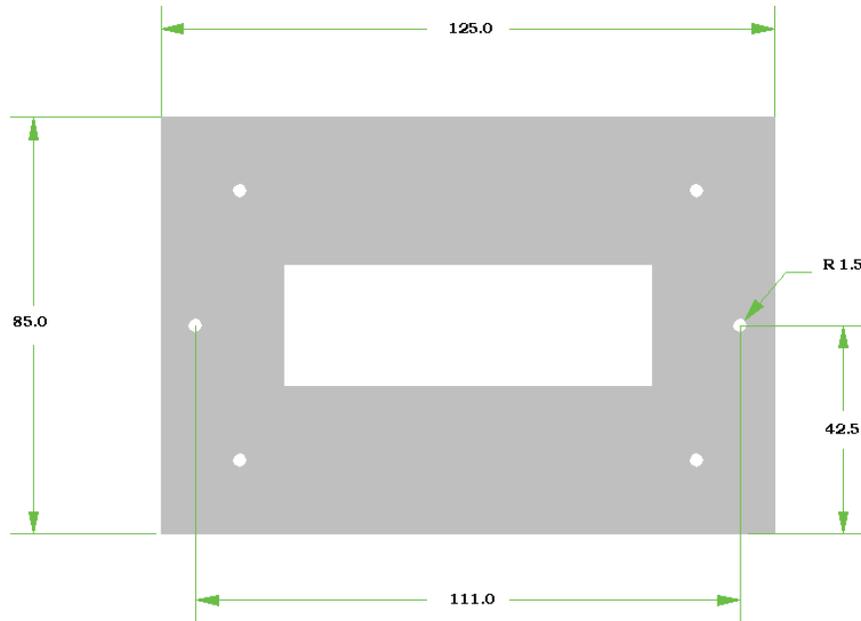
Mounting Kit dimension ( units in mm ) Thickness : 1.5 mm
